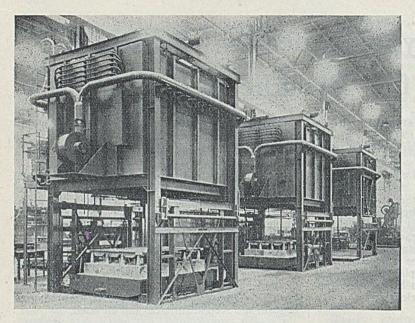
Battery of Three Elevatortype Furnaces, each of 250-kw. loading and equipped with a Cooling System.
